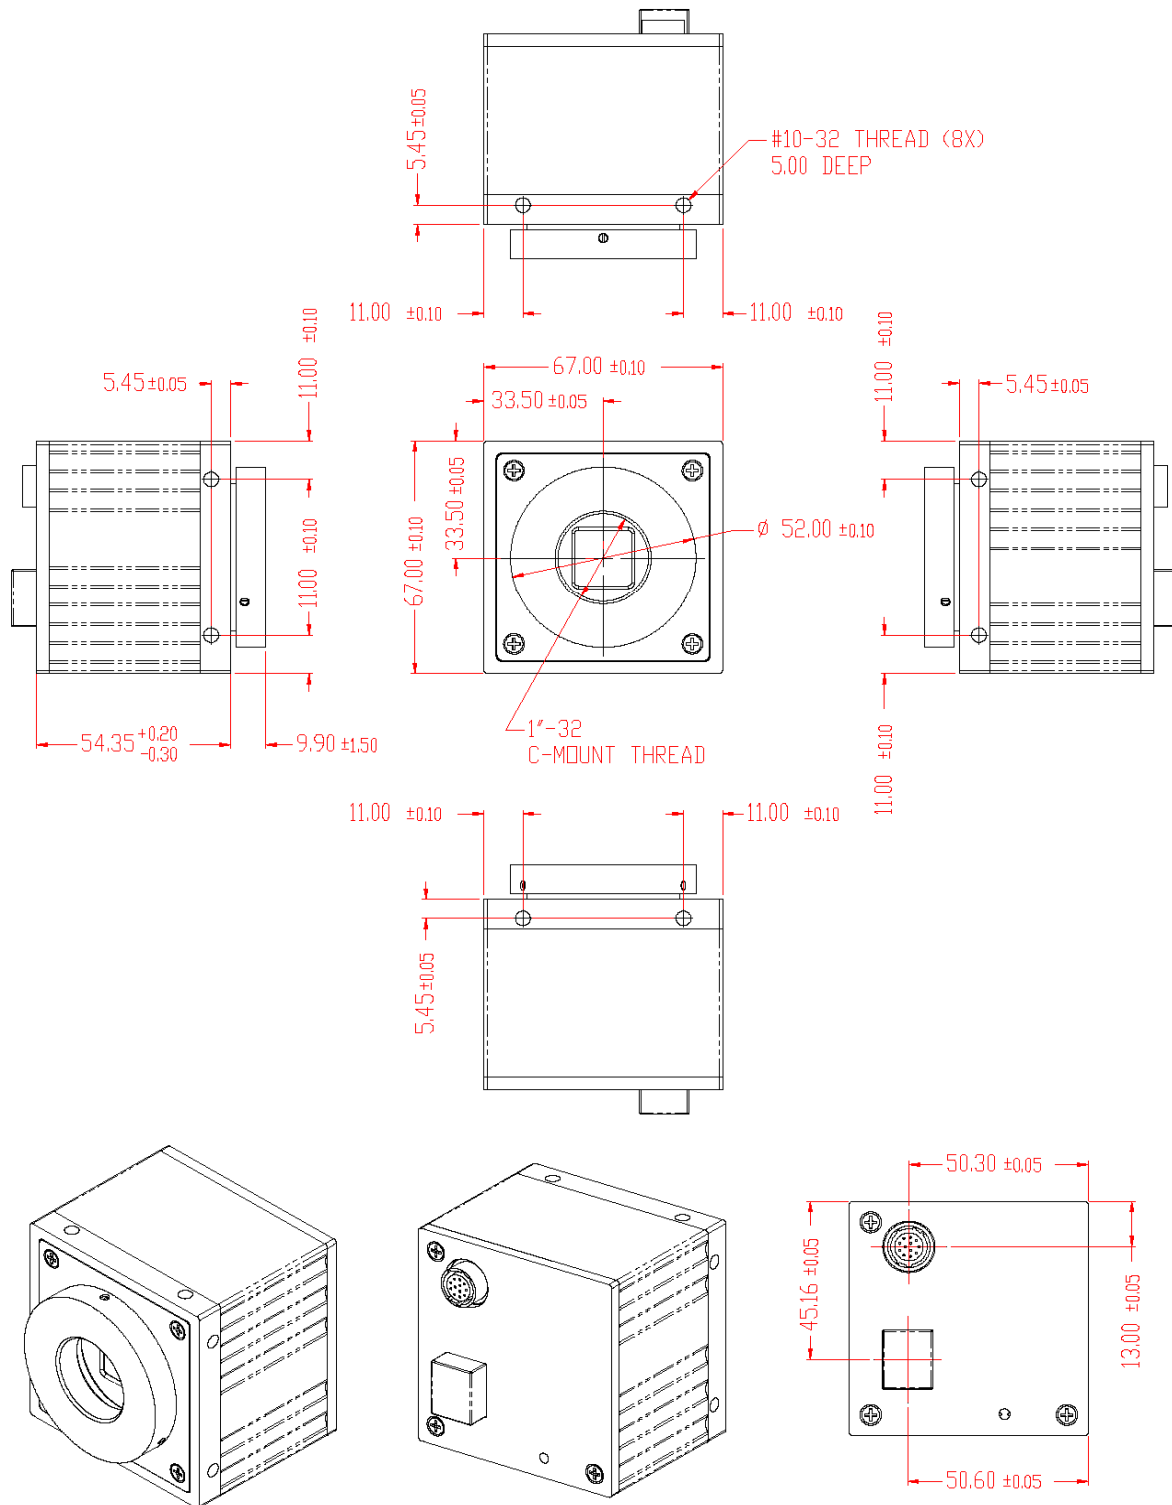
IPX-1M48-L Dimensional Drawings
